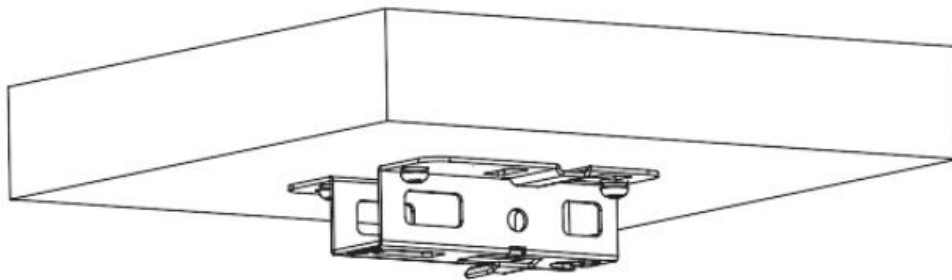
Securing Mounting Arm to Mounting Bracket
